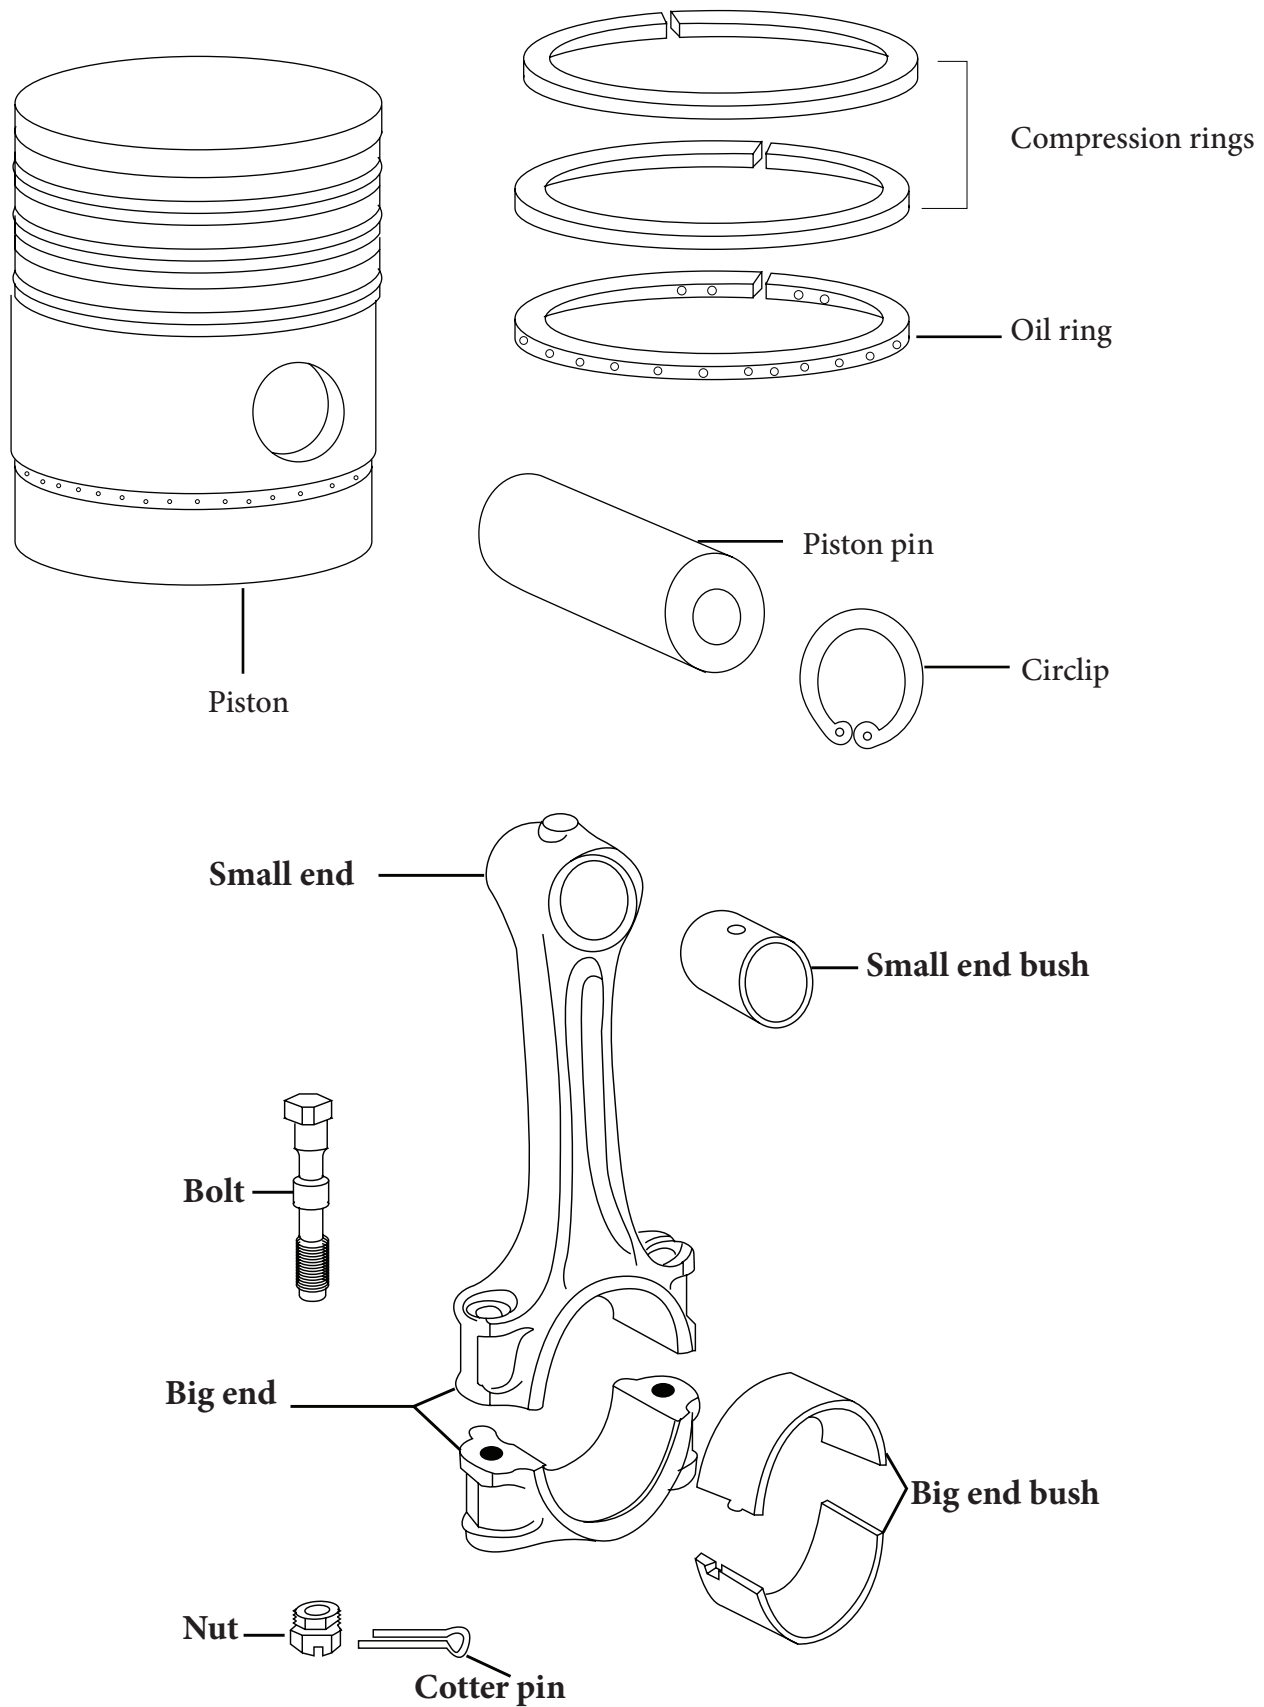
Piston and Connecting Rod Assembly - Line Diagram
